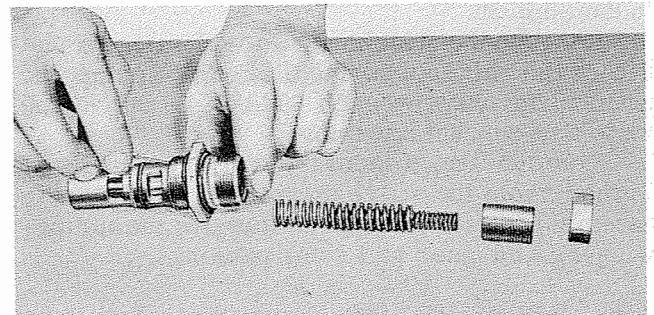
Dislodging Oil Pressure Relief Valve Retaining Circling
